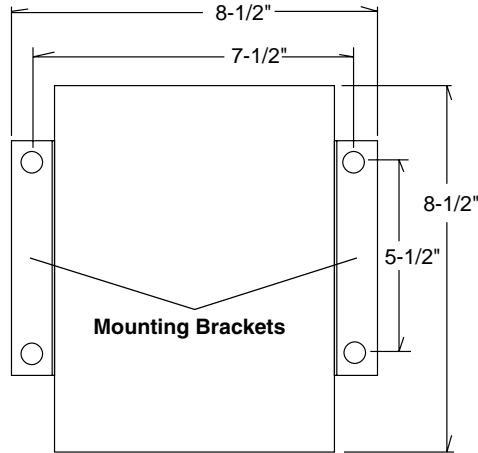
Mounting Dimensions - Current Control Receiver w/Suggested Mounting Brackets
